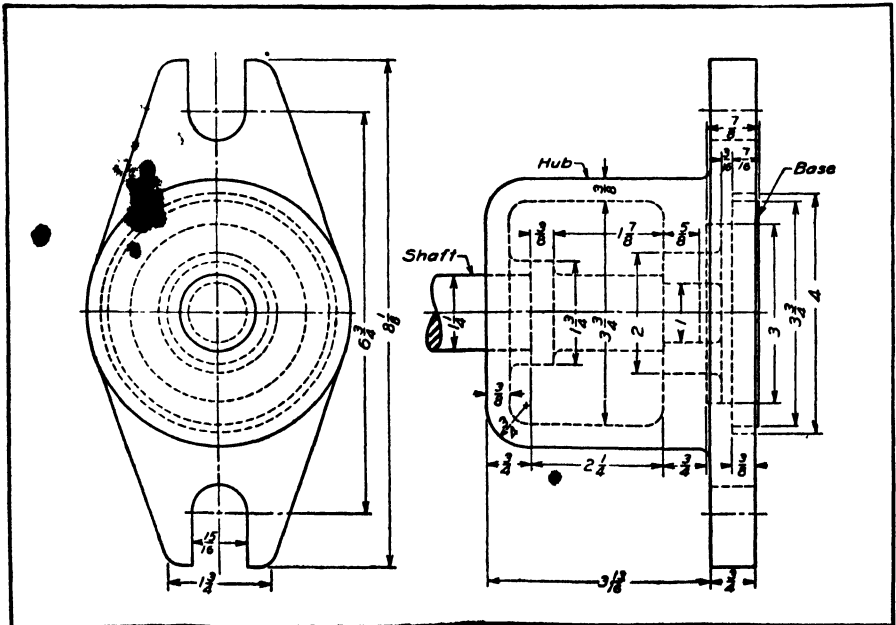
Prob. 152. Draw two views of the thrust bearing, the right-hand view to be a section. There are three parts, the shaft, hub, and base.
